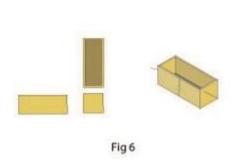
The tool box is an open box with or without a lid for storage of hydrant wrenches and other small tools that would be needed by the firemen. A couple of chock blocks of wood might be included for parking brakes. It would be embarrassing after a fire to find that the cart has left the scene on its own, following the call of gravity.
